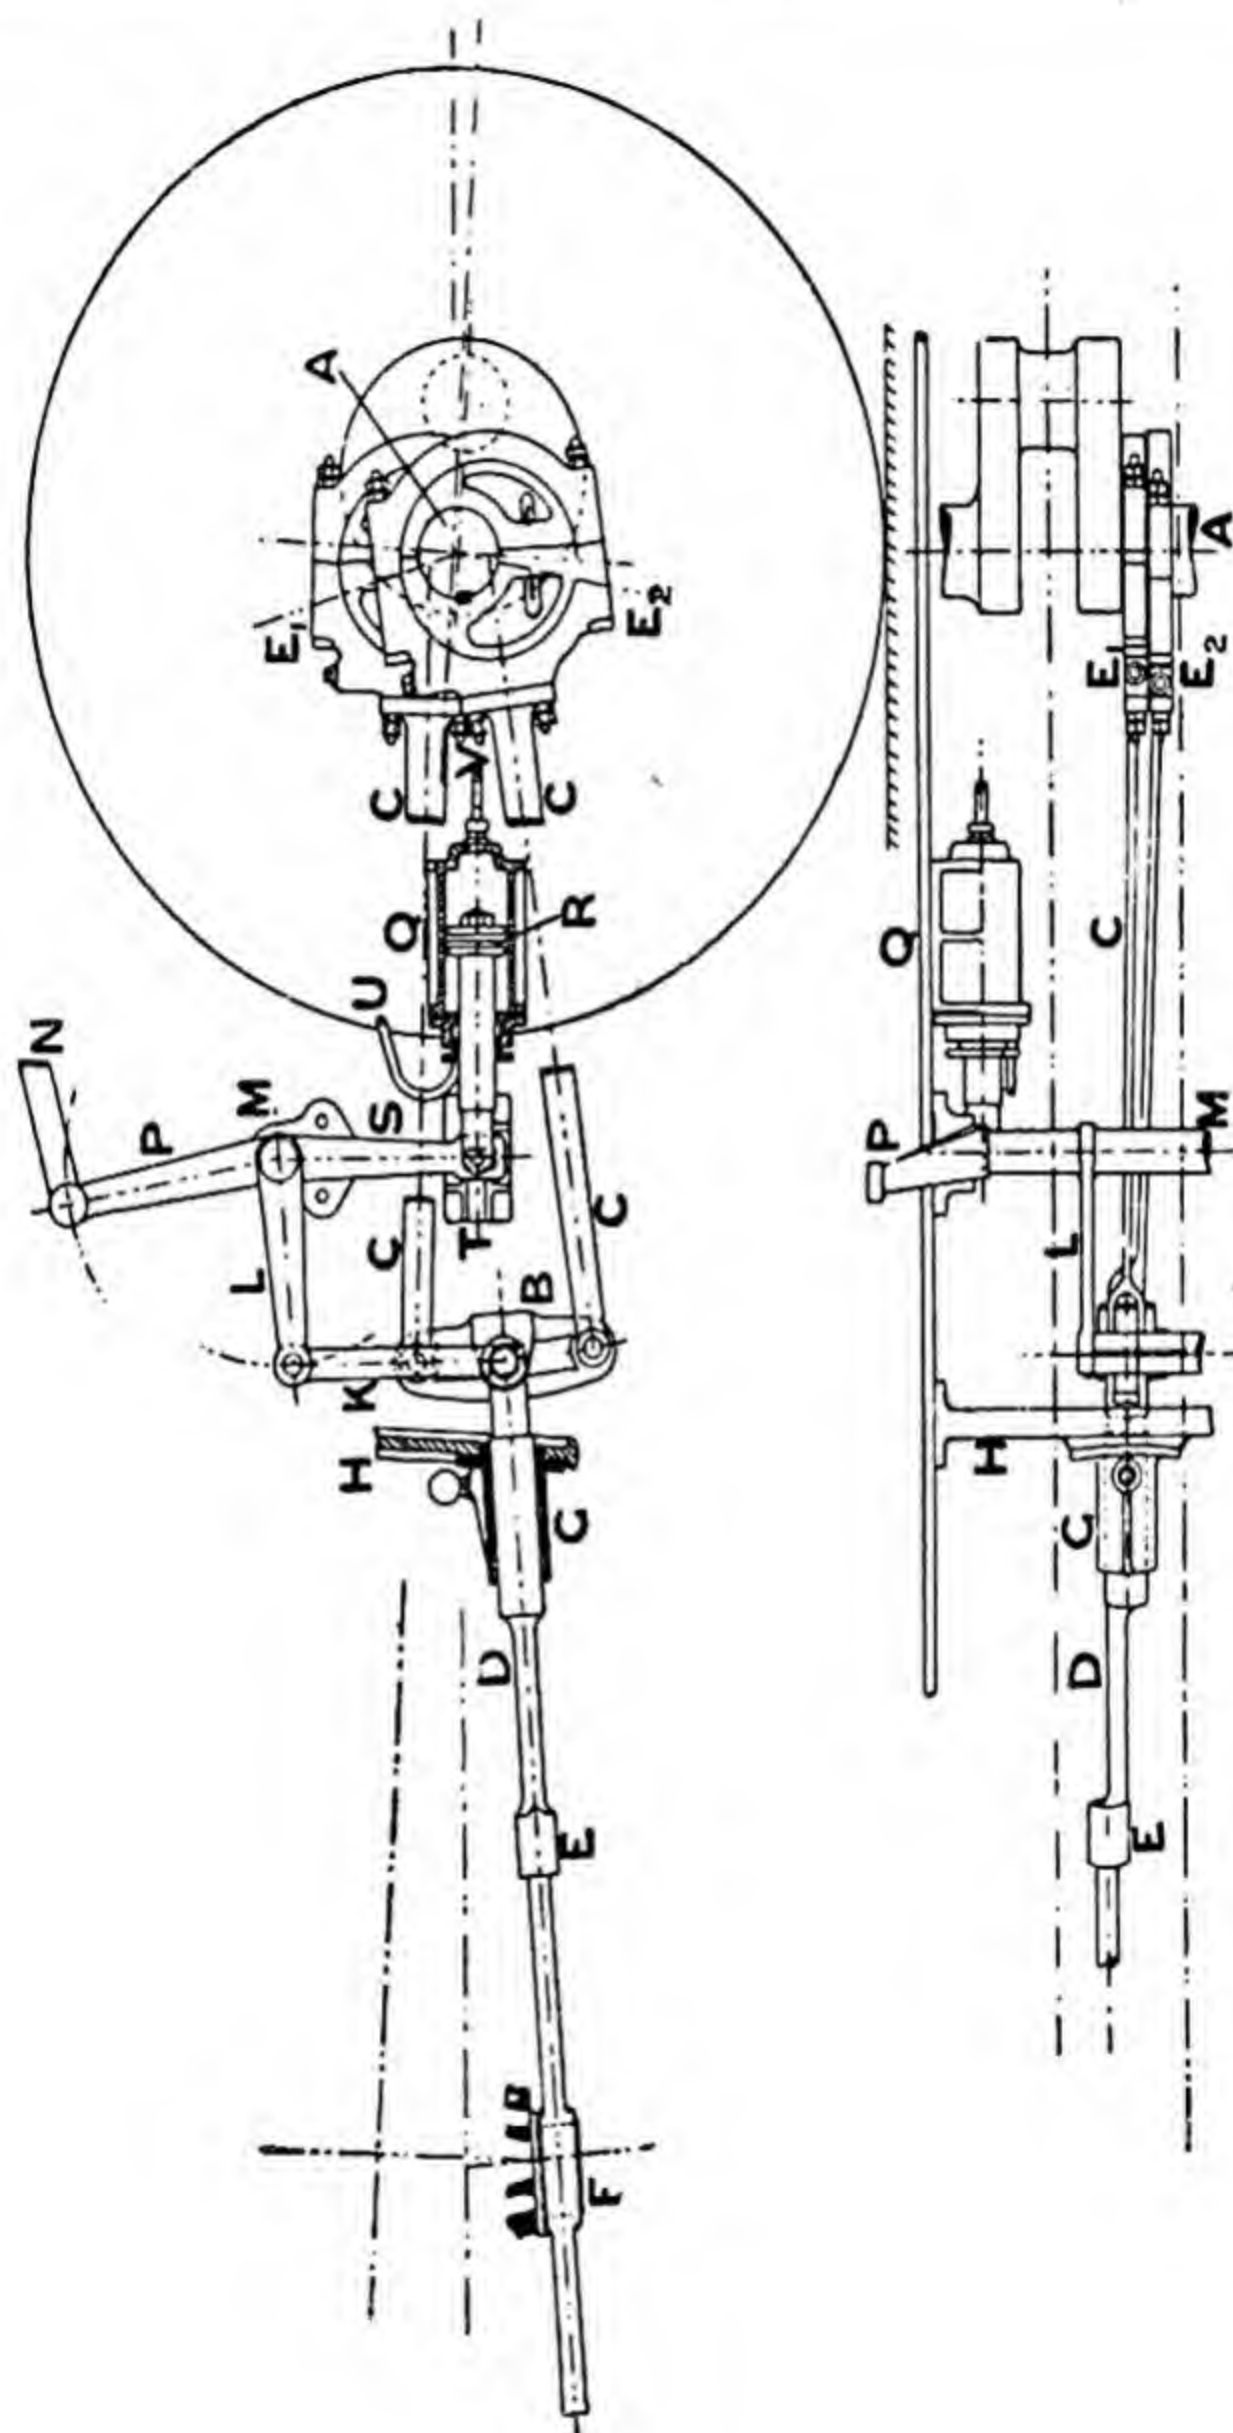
Valve gear of a Great Eastern Railway express passenger locomotive.
